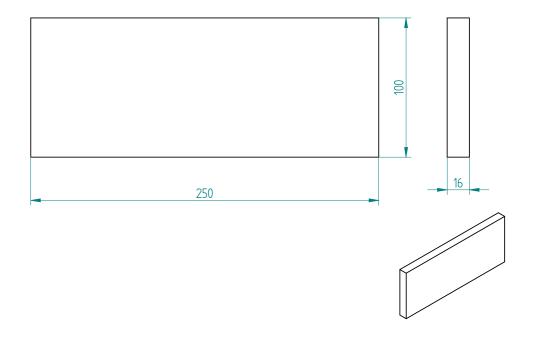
Shaped part : face-1-outsourcing for perpendiculator tool
